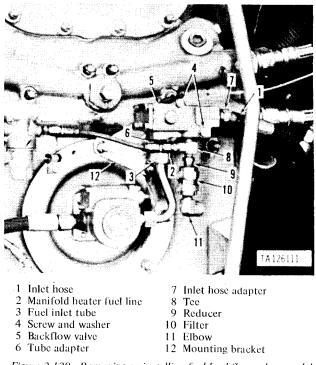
Removing or installing fuel backflow valve, model AVDS-1790-2C and AVDS-1790-2D engines.
